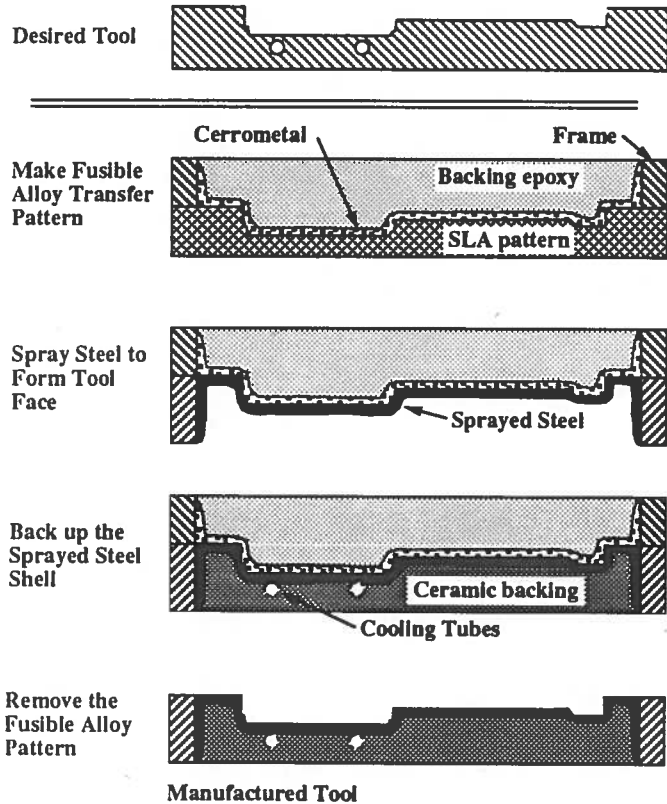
Schematic Sequence for Manufacture of Sprayed Tool
